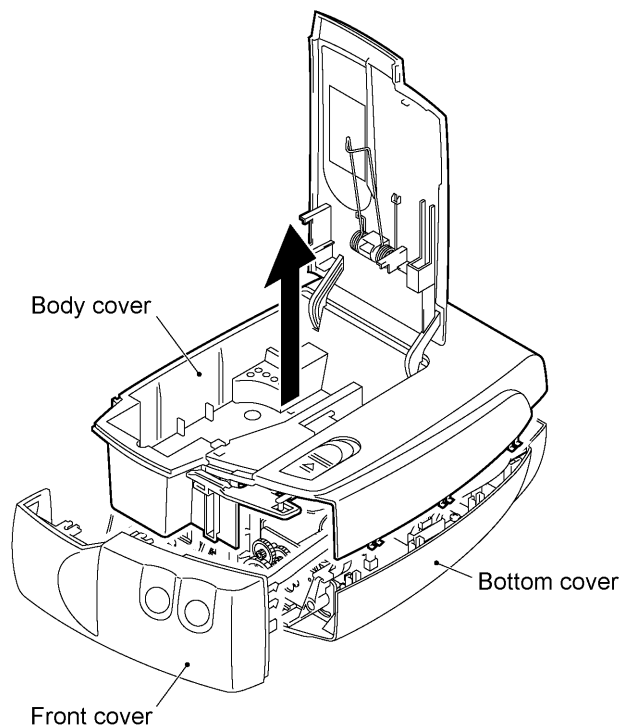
Disengaging the Body Cover from the Bottom Cover
